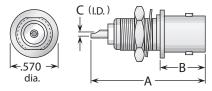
(Front mount, pressurized [nonhermetic], with mounting gasket)
